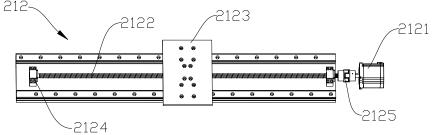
Schematic Illustration of the Spindle Guide Molding Structure of the Chamfer Processing Unit
